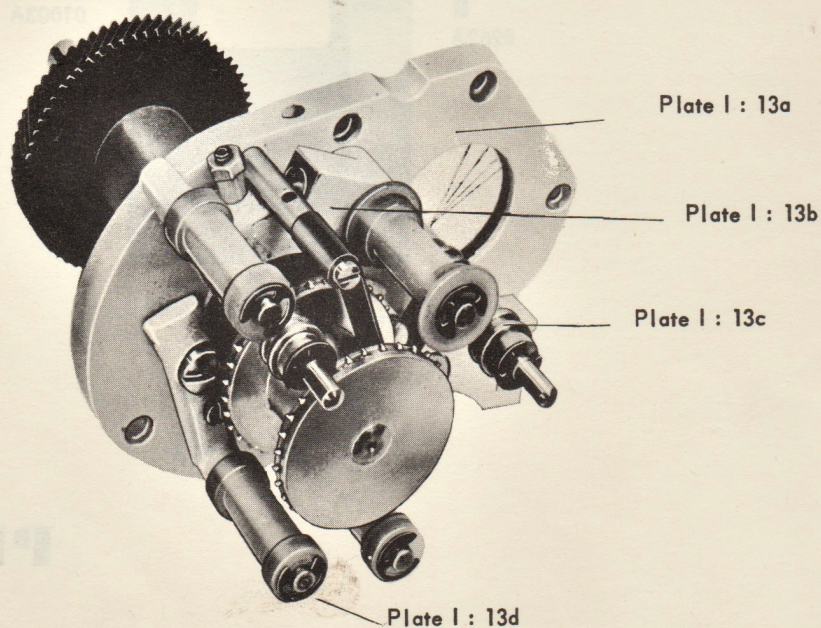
BOTTOM SPROCKET UNIT WITH ROLLERS AND BRACKET
